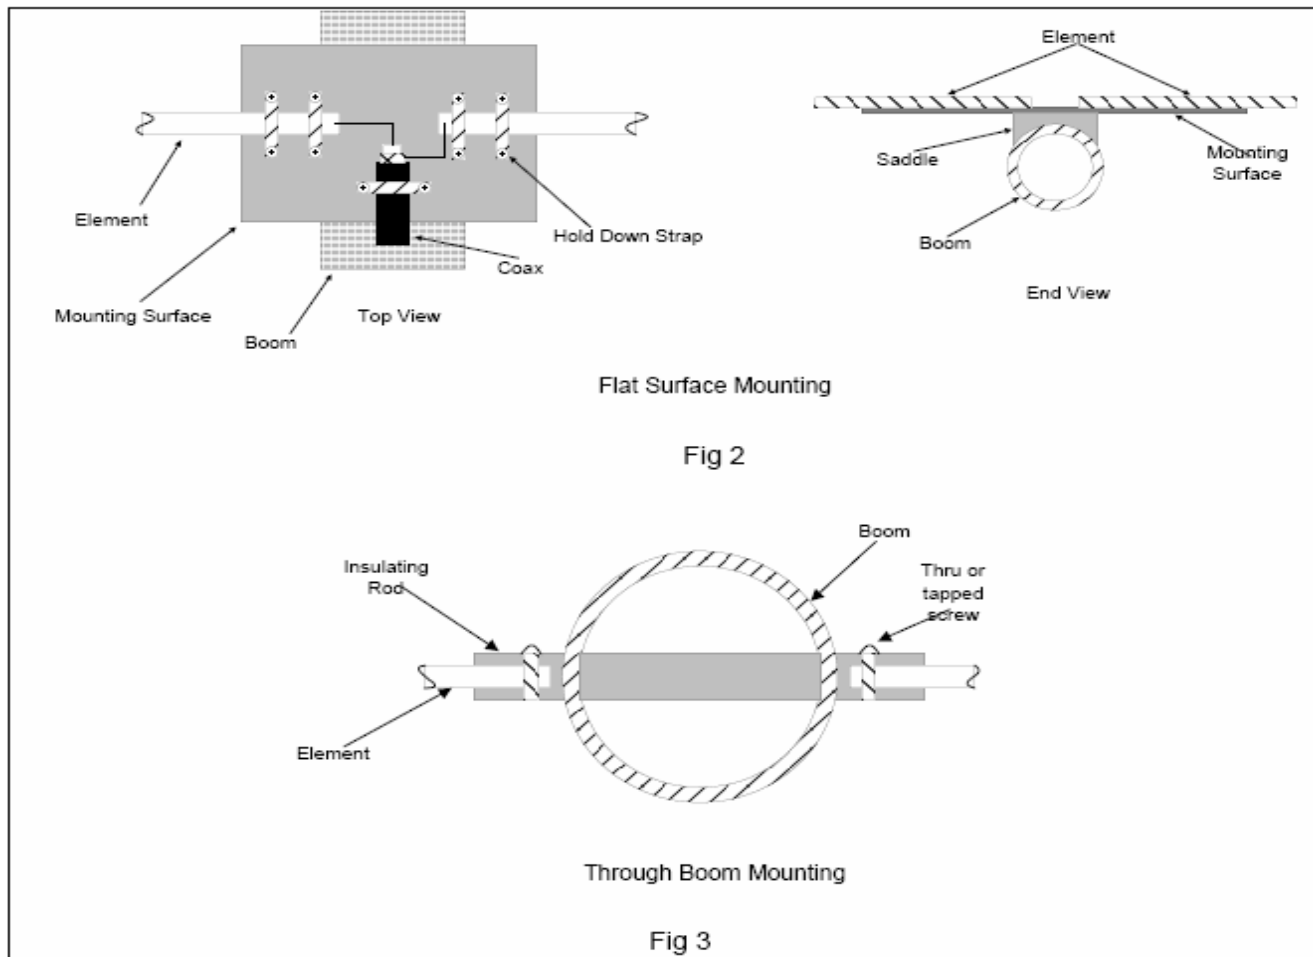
details the feedpoint construction when using a flat mounting plate of insulating material. Small wire clamps hold the half element pieces in place. Attachment of the coax feed can be made to the clamps where screwed down or if the element material is sufficiently large, it can be mounted with screws directly and the coax can be attached at the hold down screws. The element can also be tapped and the feedline attached at those points.
